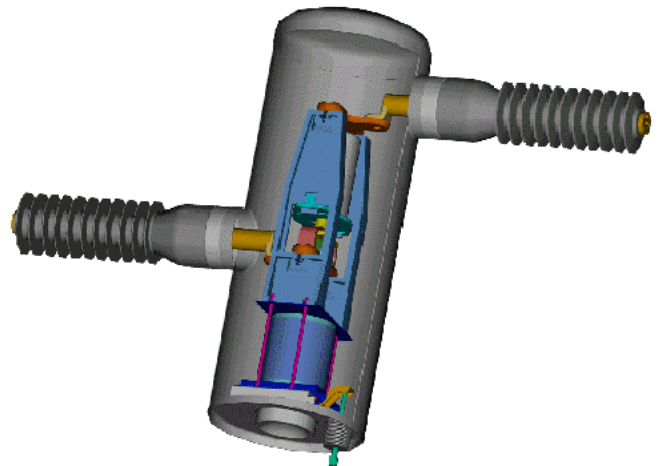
SDR single phase circuit breaker showing basic components and welded fabrication; Stainless steel tank, bushings, vacuum interrupter, and drive mechanism
